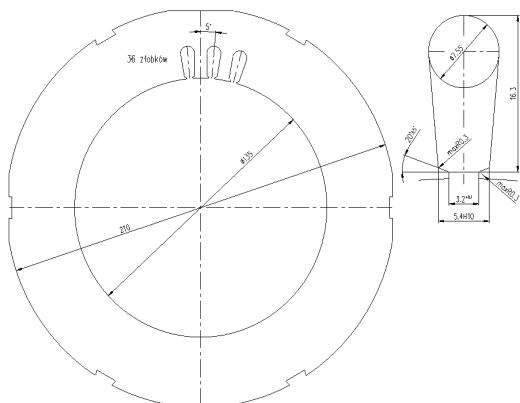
Dimensions of stator core for the motor IPMSg 132 S4 PMSM
